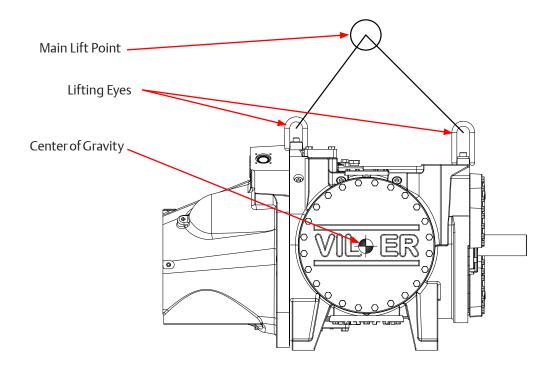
Bare Shaft Compressor Assembly Center of Gravity (Models 2401-3001)
